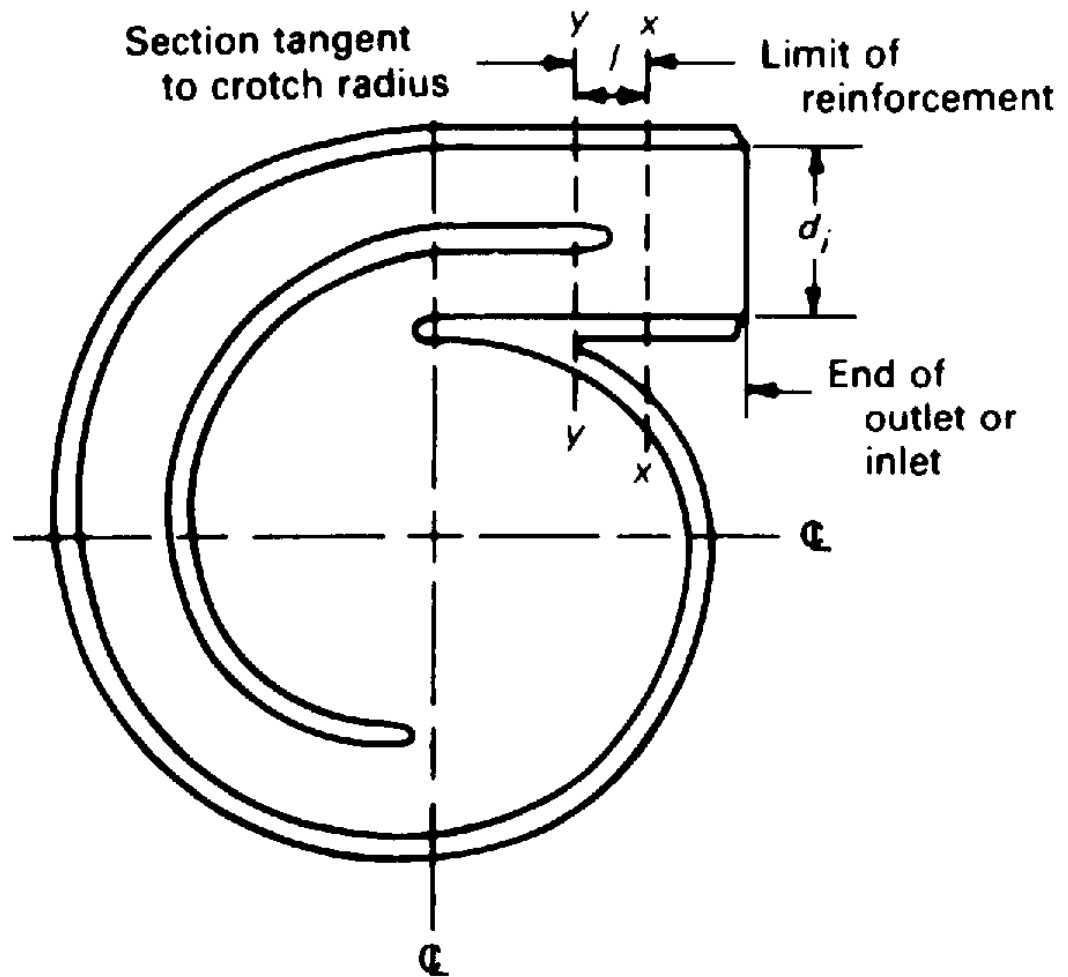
MINIMUM TANGENTIAL INLET AND OUTLET WALL THICKNESS
